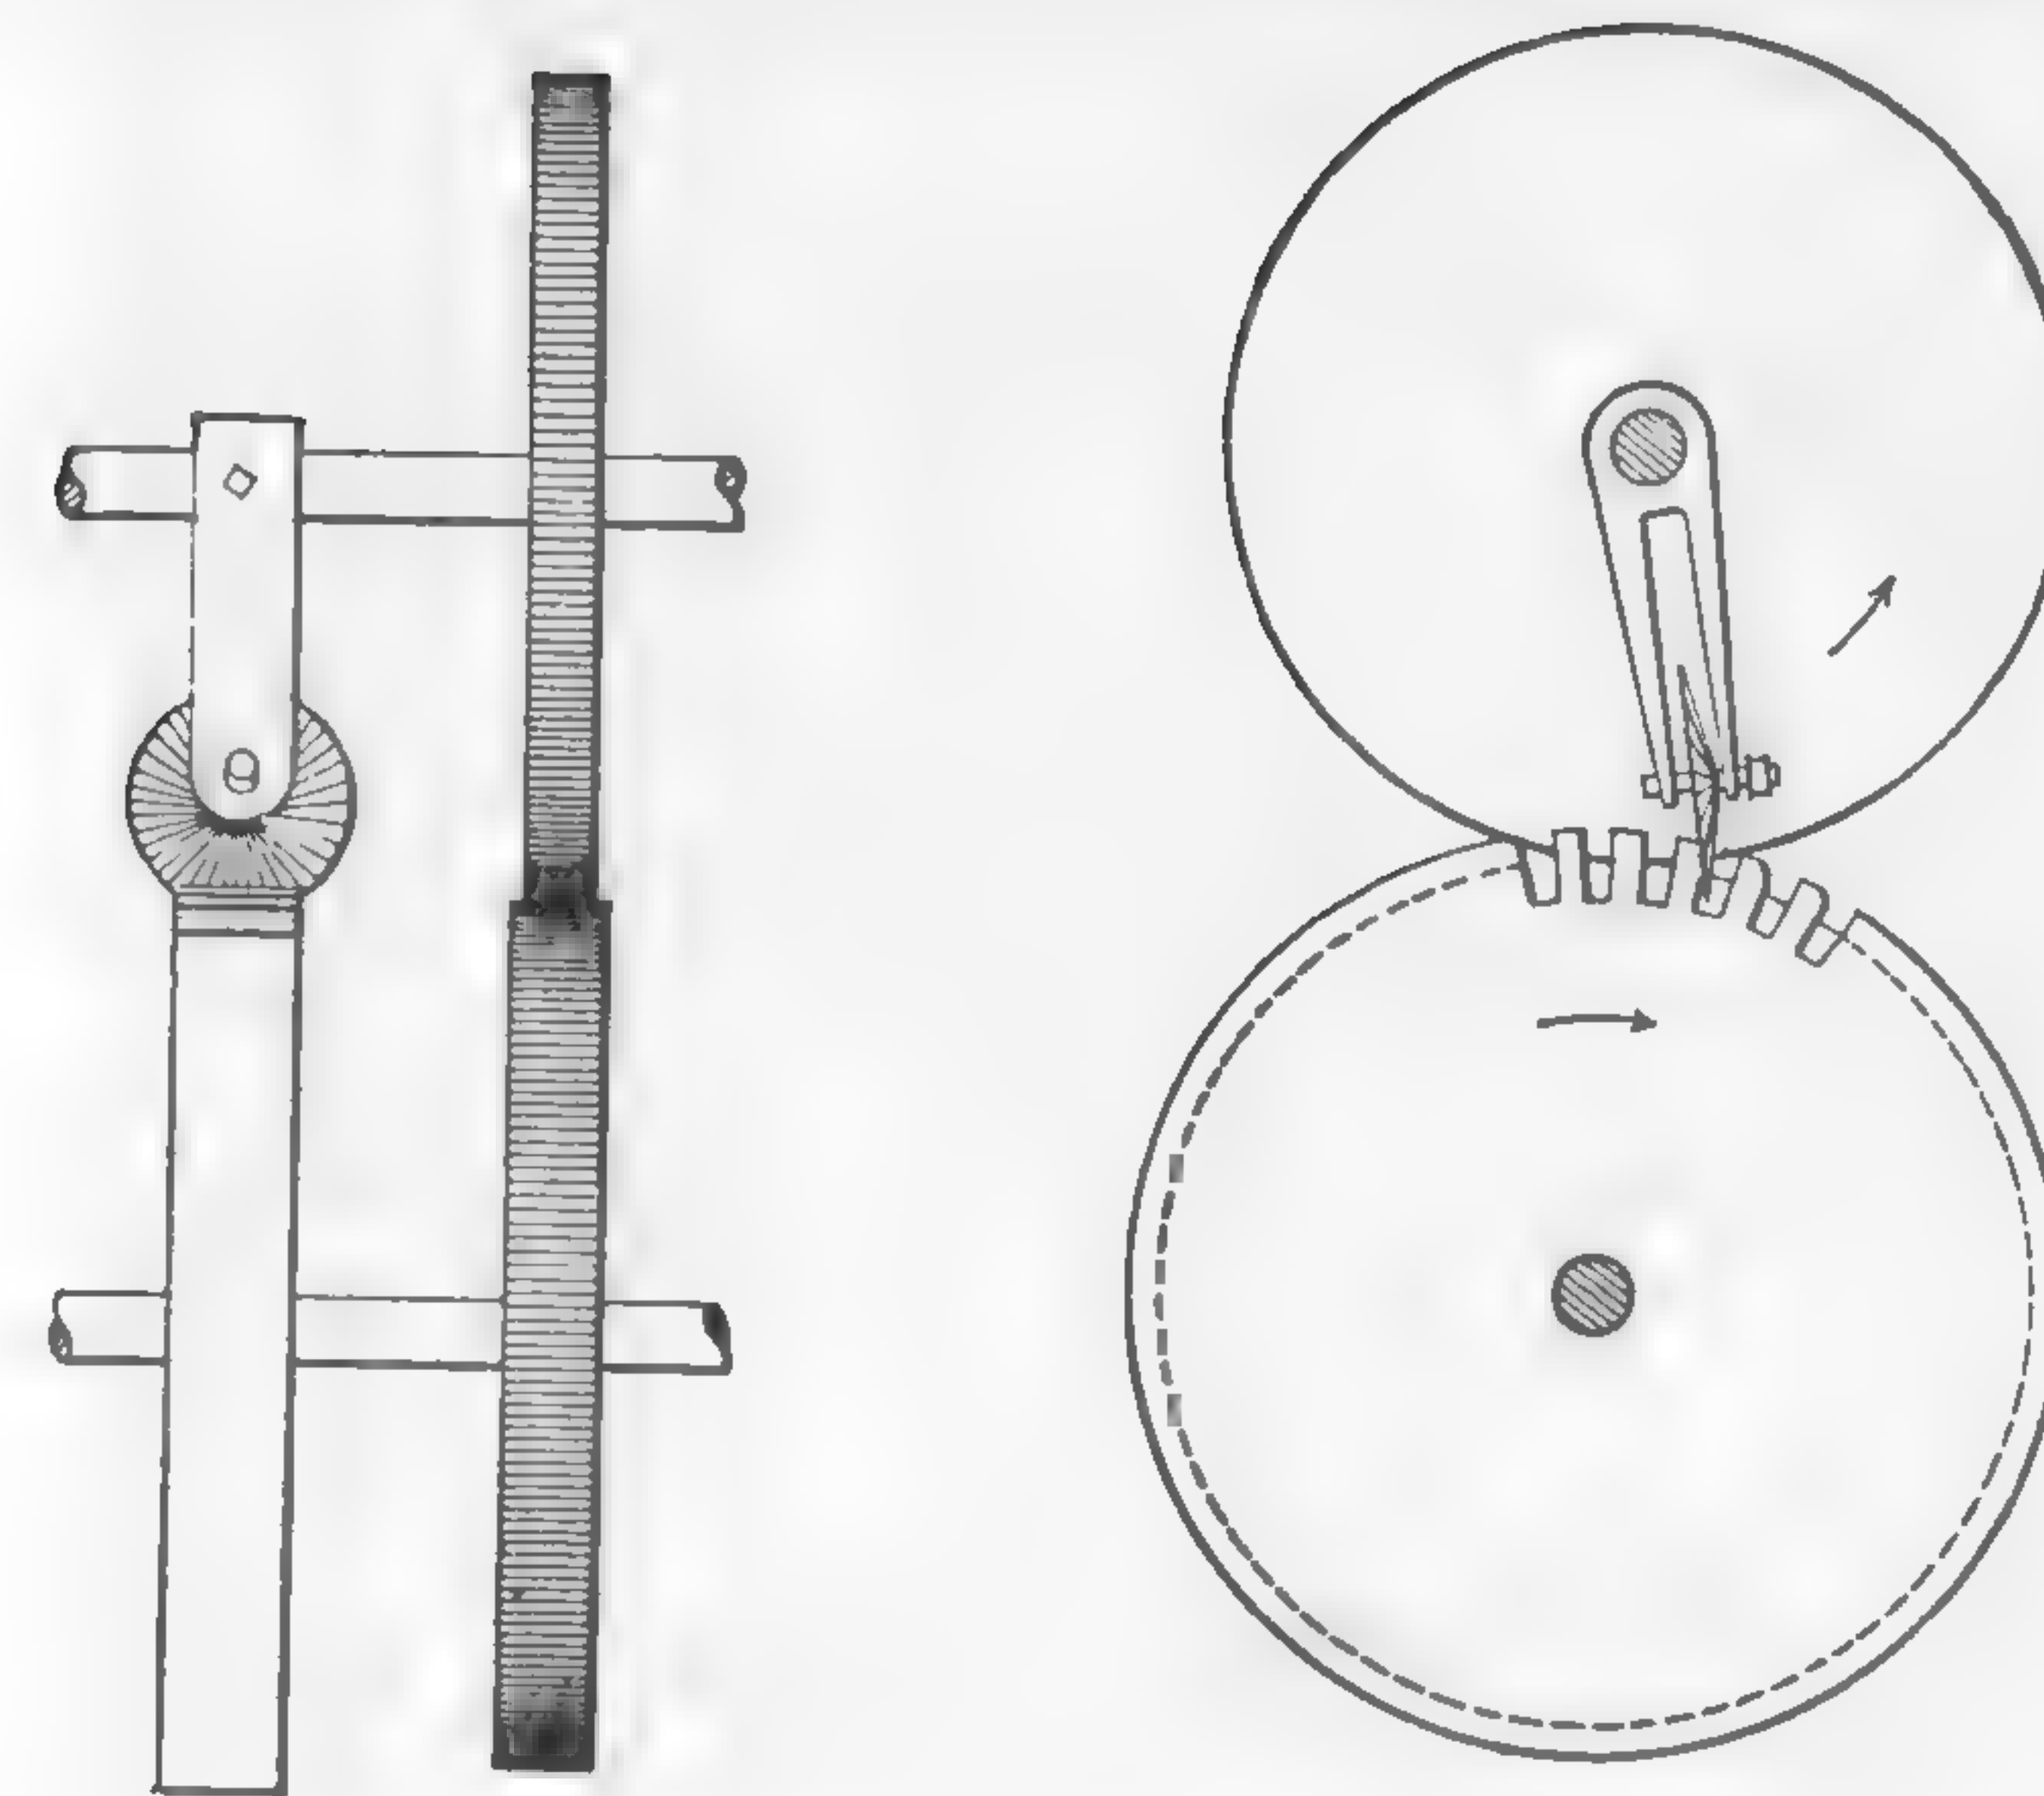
SAXTON'S GEAR-GENERATING MACHINE, BEFORE 1842
